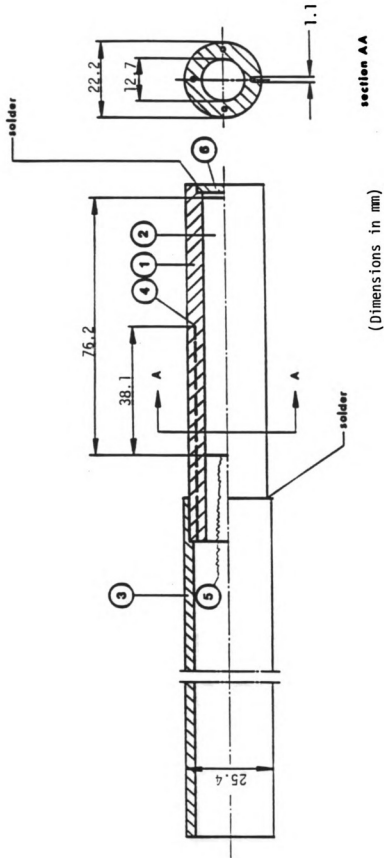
Plain copper tube test section #1. Legend: 1-Boiling Surface, 2-Cartridge Heater, 3-Stainless Steel Support Sleeve, 4-Thermocouple Well, 5-Electrical Leads, 6-End Plug.
